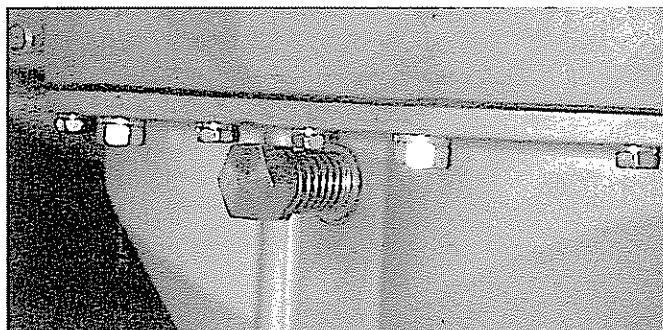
C2-05 - Power Valve - IMPCO 600 D
